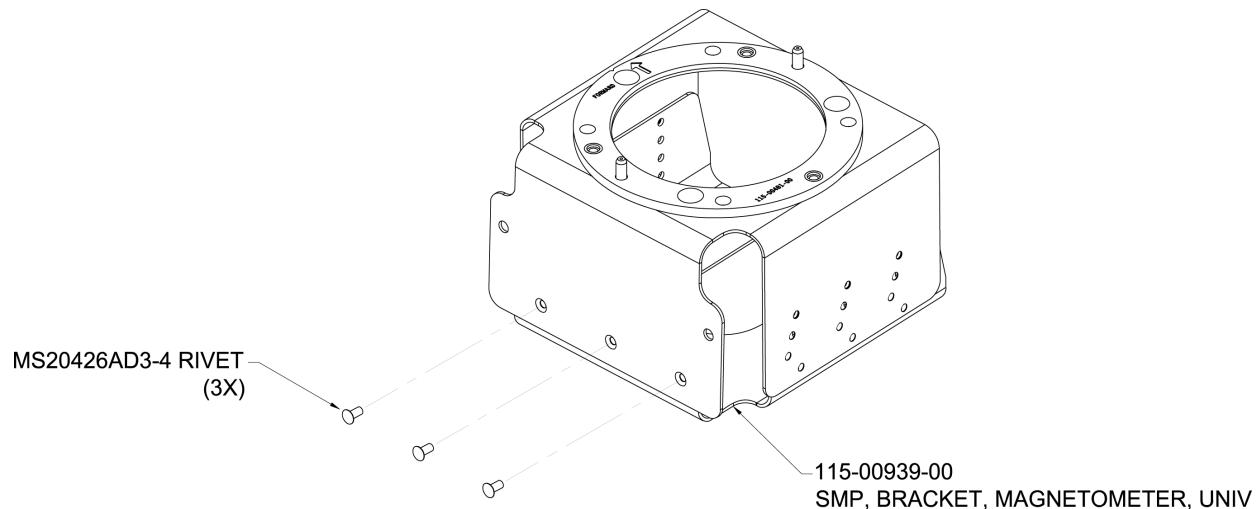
Lancair IV/IV-P GMU 22 Mounting Bracket Assembly
